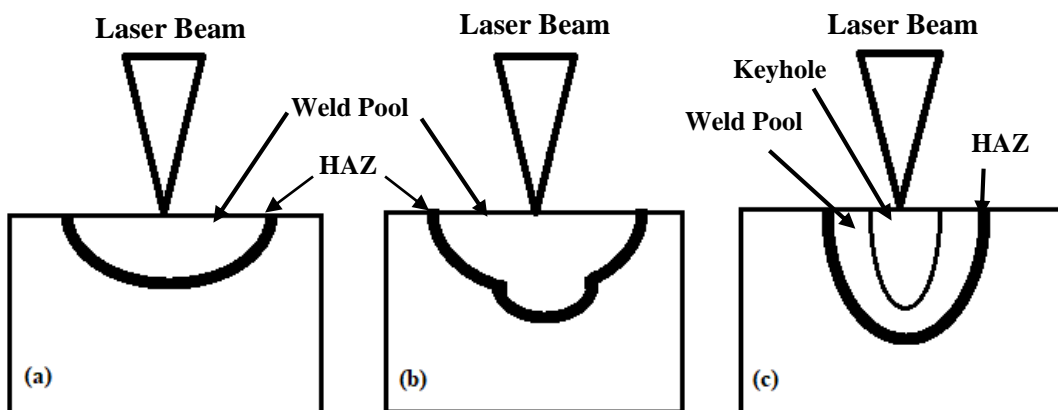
Schematic of different modes of laser welding (a) Conduction mode, (b) Transition mode and (c) Keyhole/Penetration mode.
